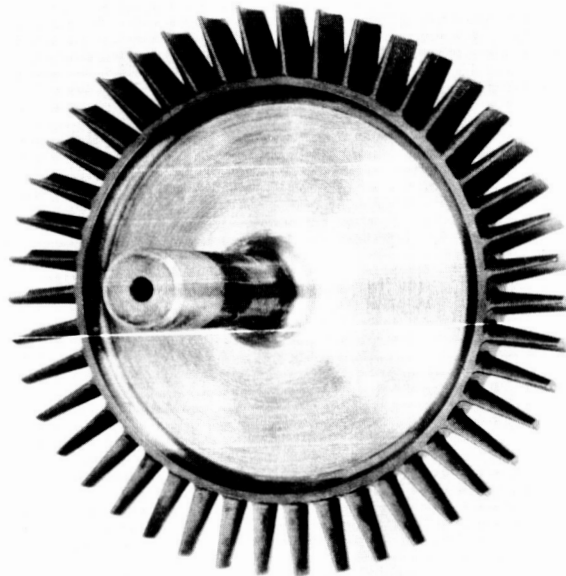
BIMETAL TURBINE-WHEEL CONFIGURATION FOR ELECTRON-BEAM WELDING (REF. 48)
